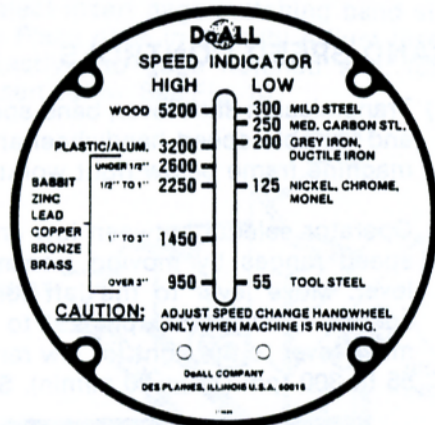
C. TYPICAL BAND SPEED INDICATOR -- MACHINES BEFORE SERIAL NO. 457-87613.
